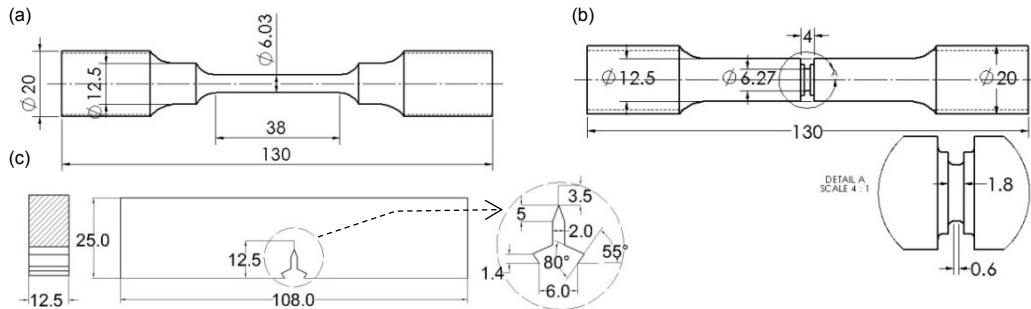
Geometry and dimensions of (a) smooth specimen, (b) short-gauge specimen, and (c) SENB specimen
